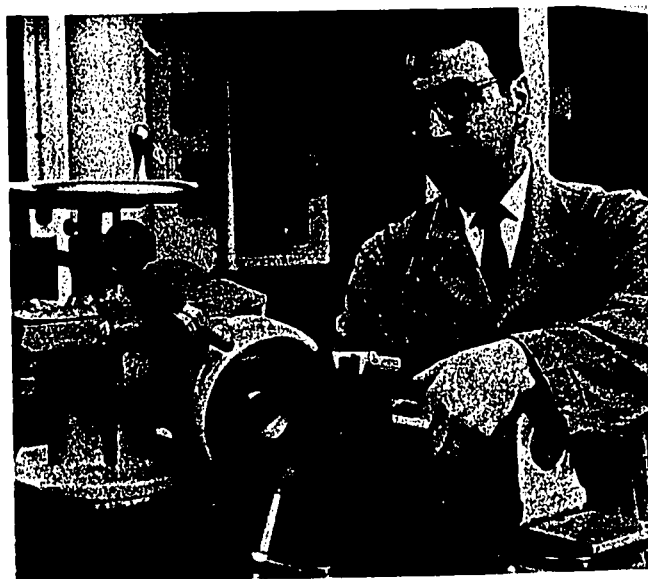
A dry-carbide grinding technique with a diamond wheel is used on this tool and cutter grinder to sharpen this mill cutter.
